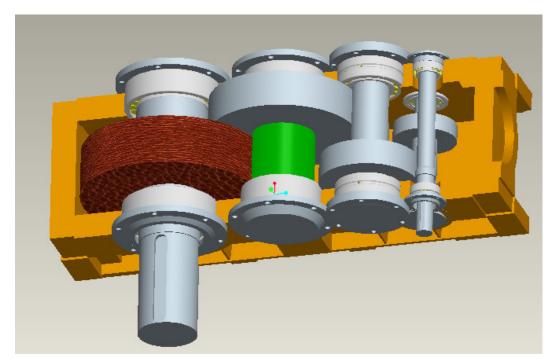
VIEW OF ASSEMBLY WITH INTERNALS (TOP CASING REMOVED)
